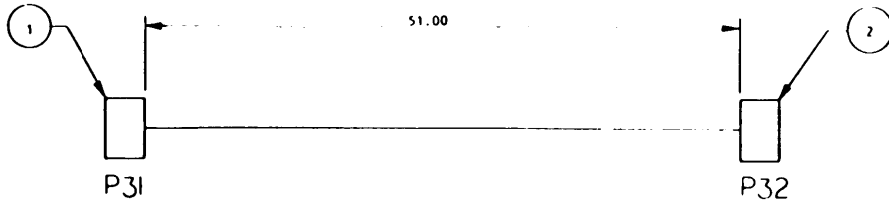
Precise Relay Assembly to Governor Control Unit Wiring Harness, Drawing No. 72-2245
